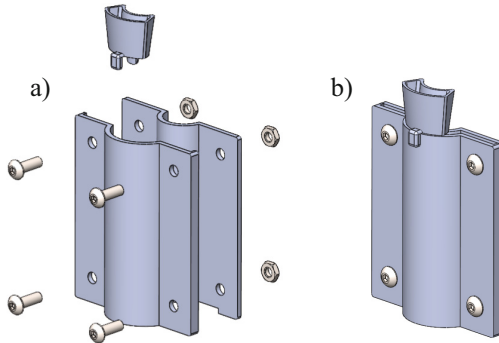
CAD model of the mold, exploded view (a), and closed configuration (b).
